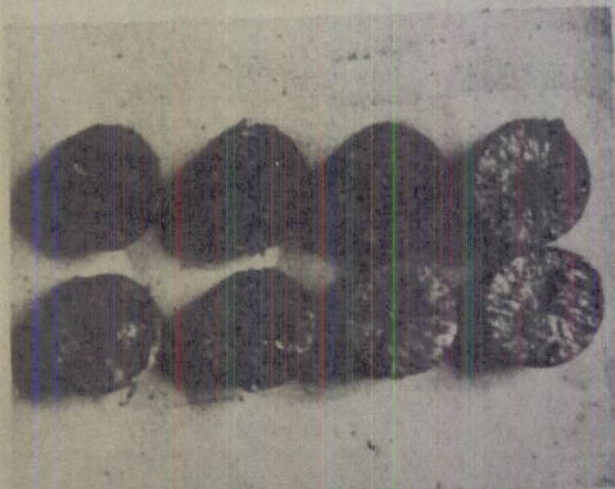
BROKEN ENDS OF TEST BAR, SHOWING FRACTURE.
